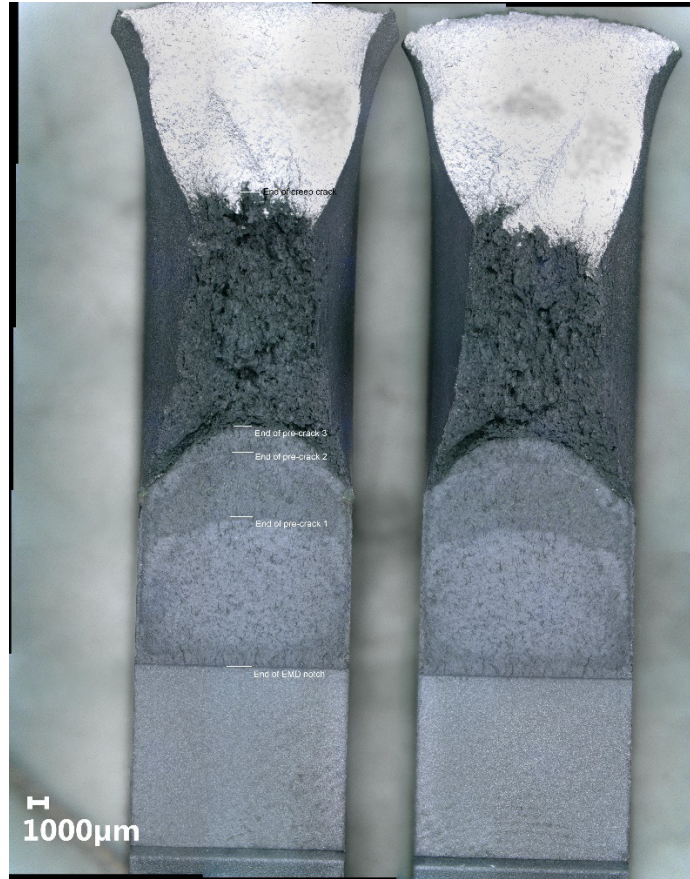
Fracture surface for Alloy 617, CCGR Test 1.
